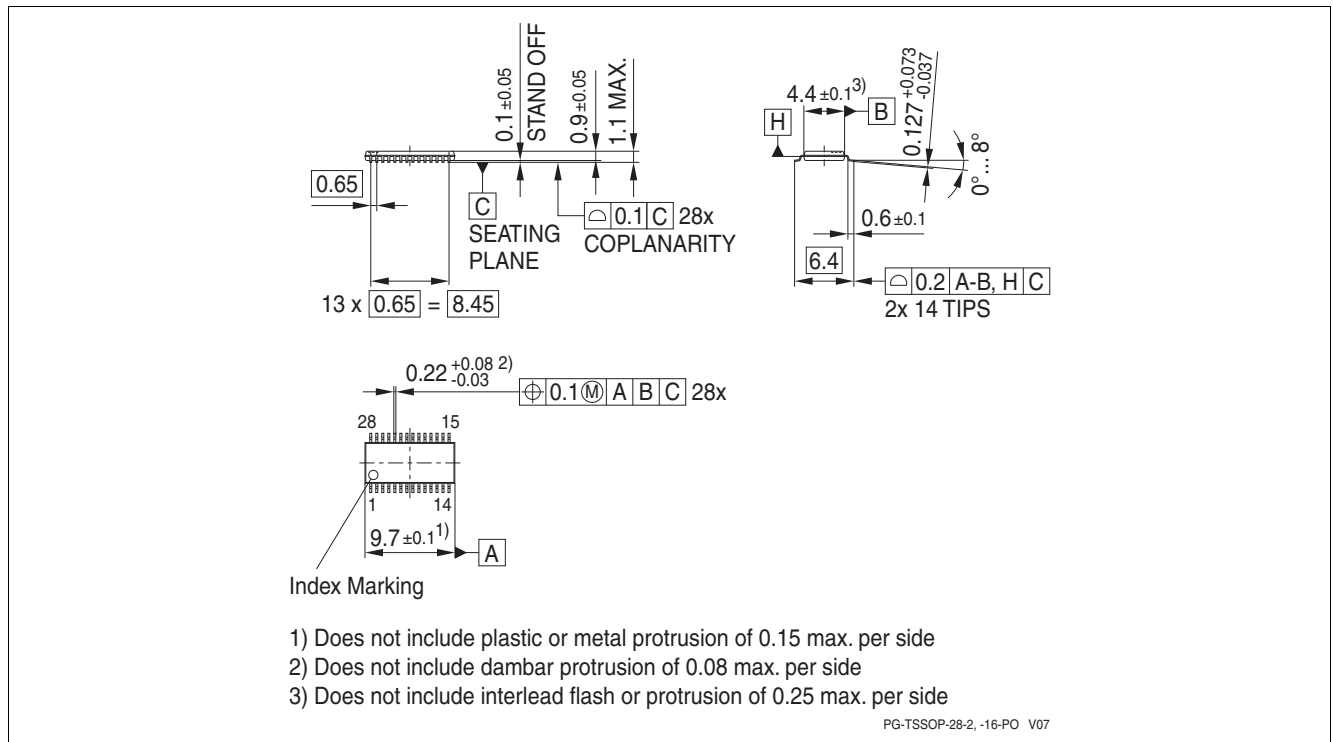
Package Dimensions PG-TSSOP-28-2
